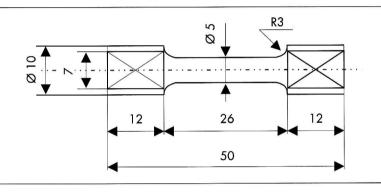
Geometry and dimensions (in millimetres) of the torsion test specimen
